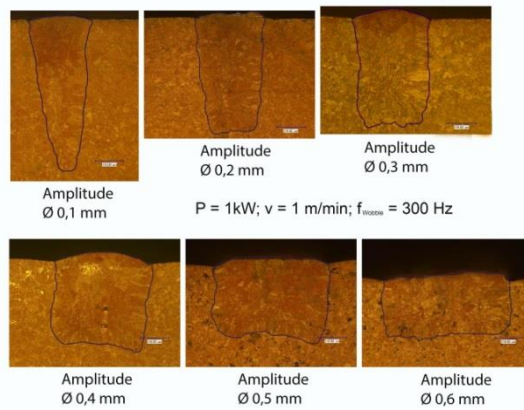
Weld cross section for different wobble amplitudes
